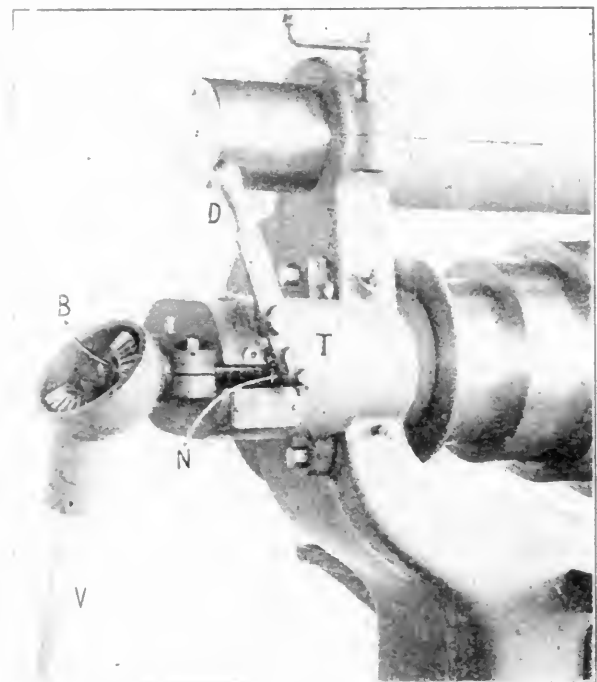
FRONT VIEW OF UPPER GEAR BOX.
